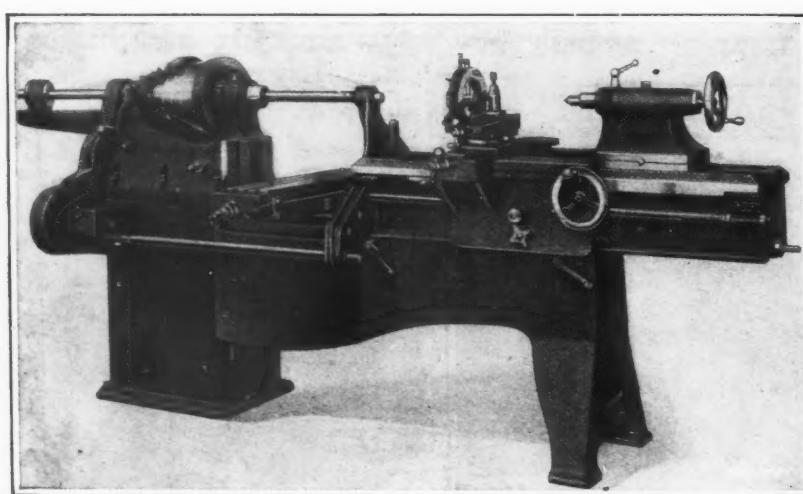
Fleming Combination Lathe arranged for Use as a Horizontal Boring Mill and Milling Machine
